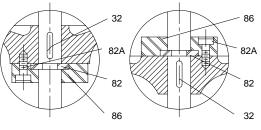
Thrust Ring Assembly Mounted at Bottom
